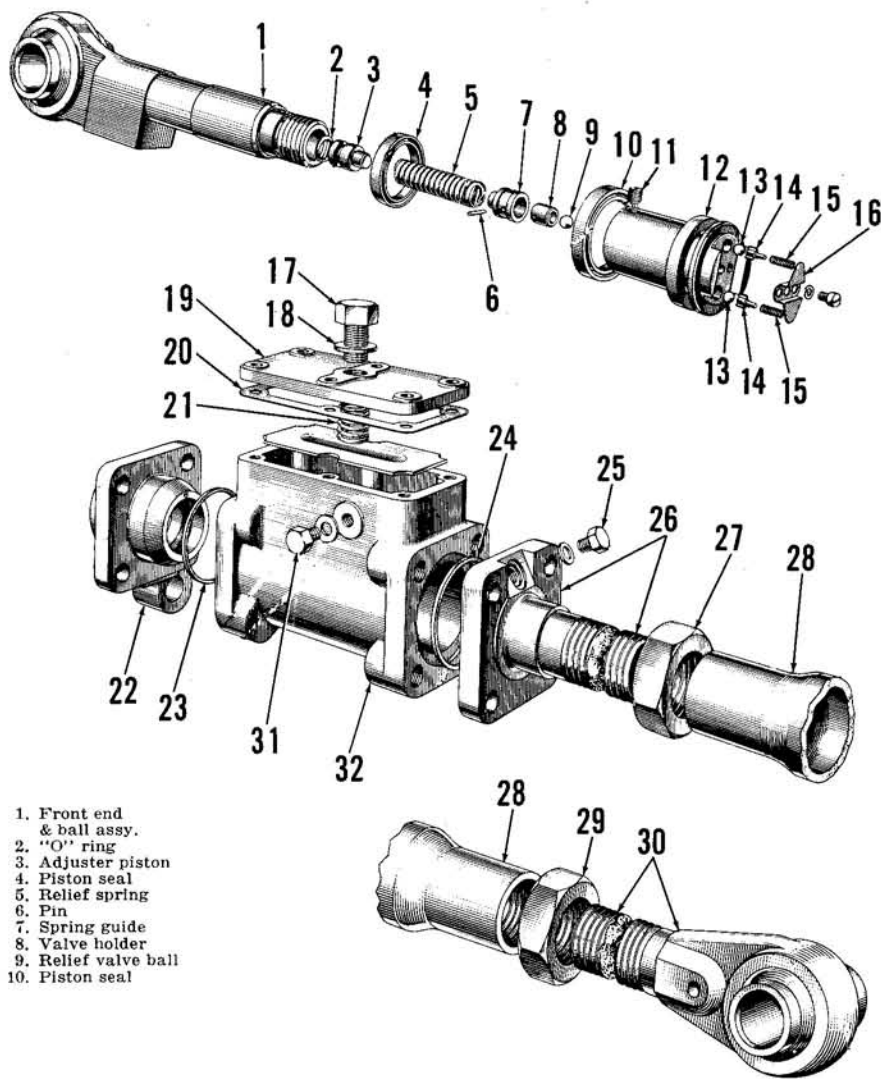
Exploded view of typical automatic clutch release cylinder and three-point hitch top link assembly. Early units used leaf springs instead of coil springs (15) shown.
